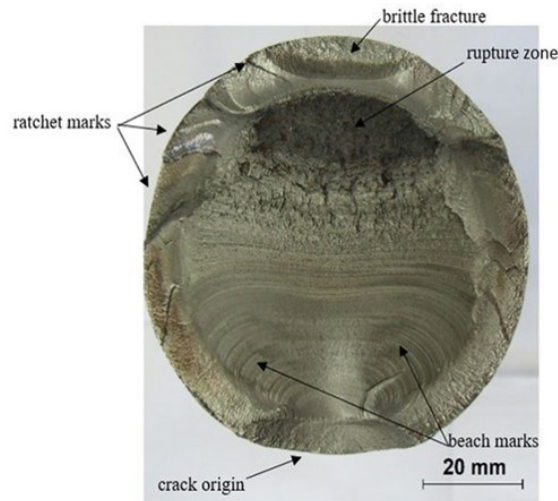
Laboratory specimen used for fatigue testing showing fatigue crack initiation, propagation and fracture [35]
